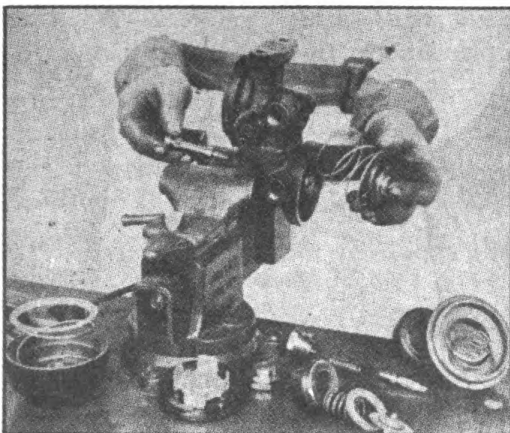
RELAY—EMERGENCY VALVE—REMOVING VALVE STEM AND DIAPHRAGM
